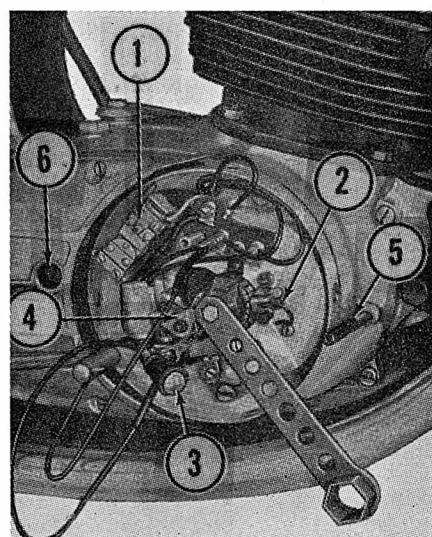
View of right side with cover removed. Refer to text for adjusting the ignition timing.
